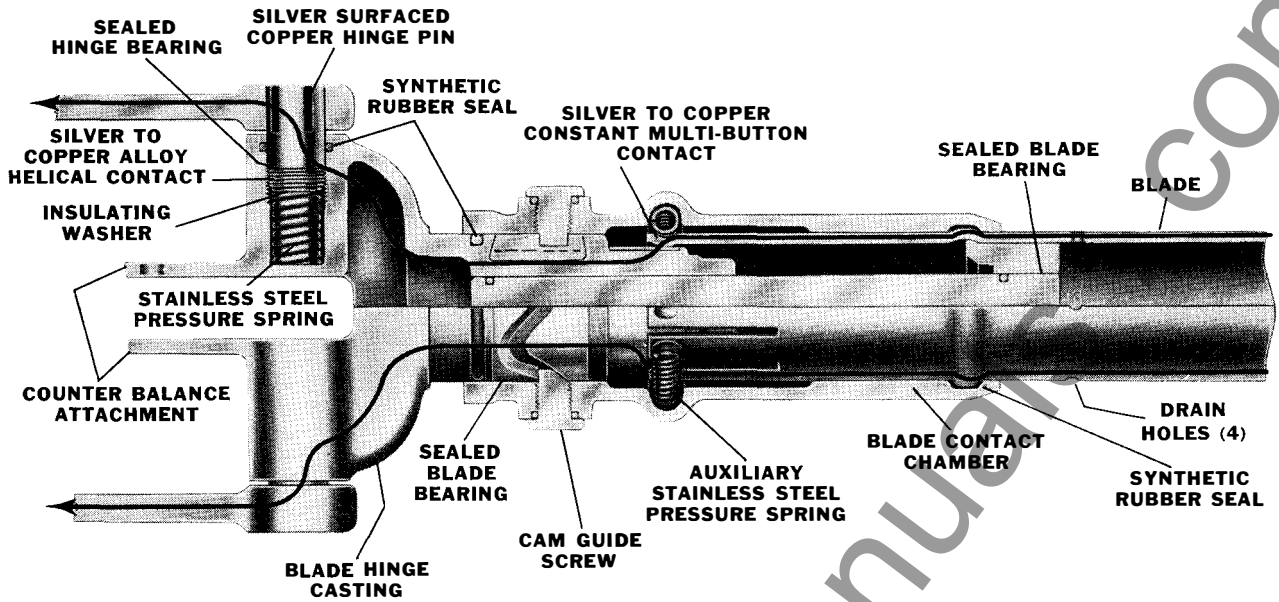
Cut-away View of Hinge and Blade Contact Chamber, 5-inch Bolt Circle.
